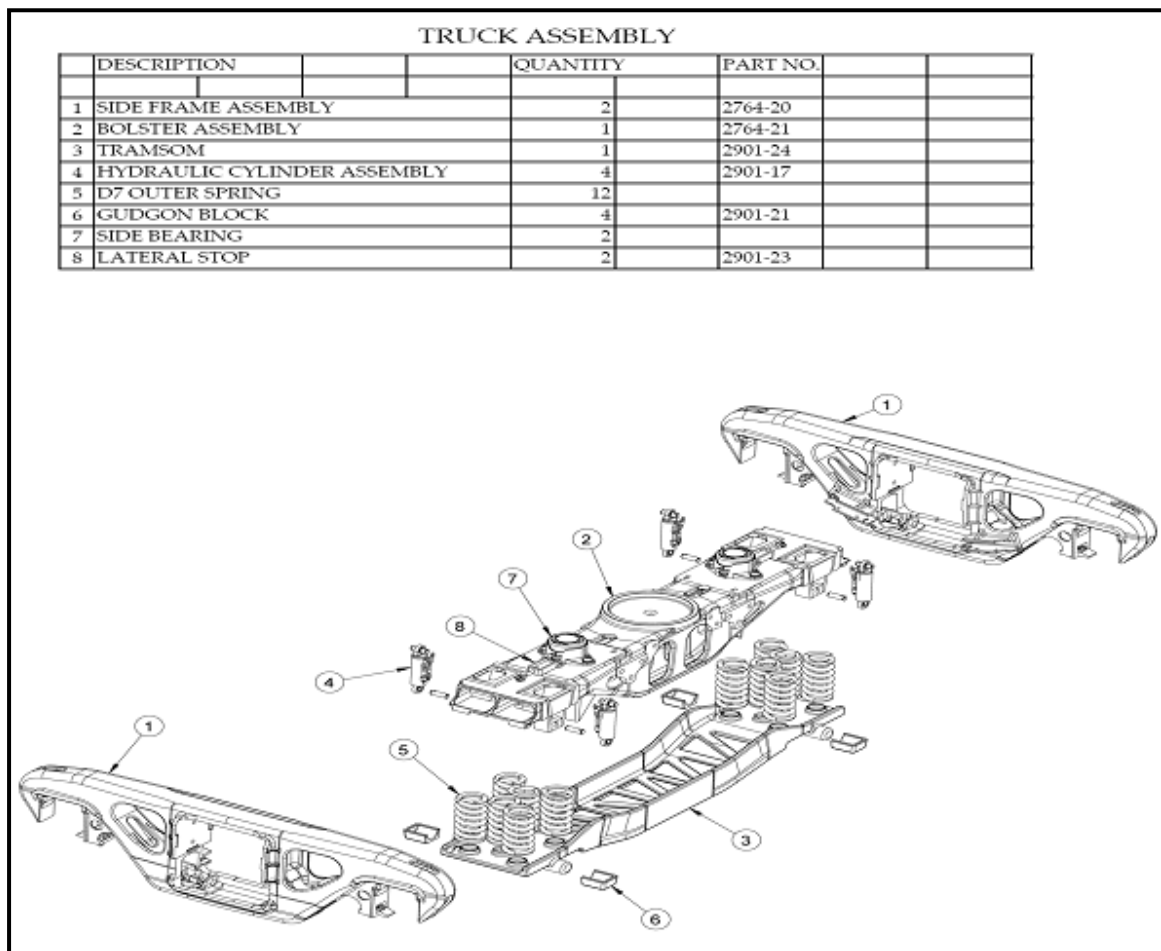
Truck Assembly (Courtesy of Amsted Rail).
